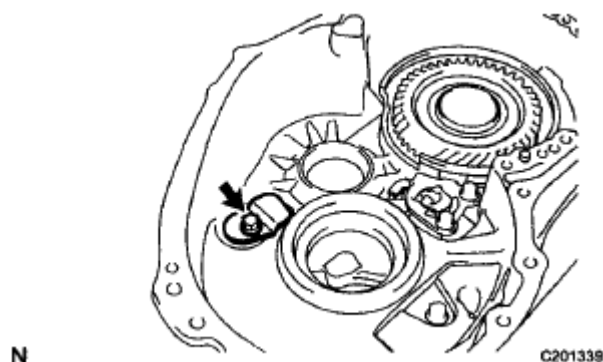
Locating Pawl Shaft Clamp And Bolt
